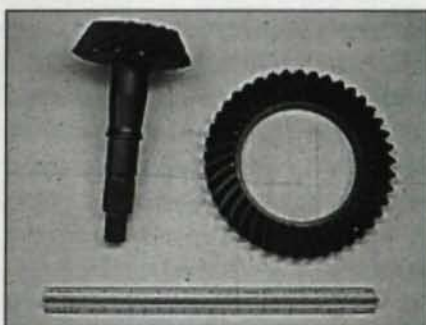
ADI Hypoid Ring and Pinion Gears.
